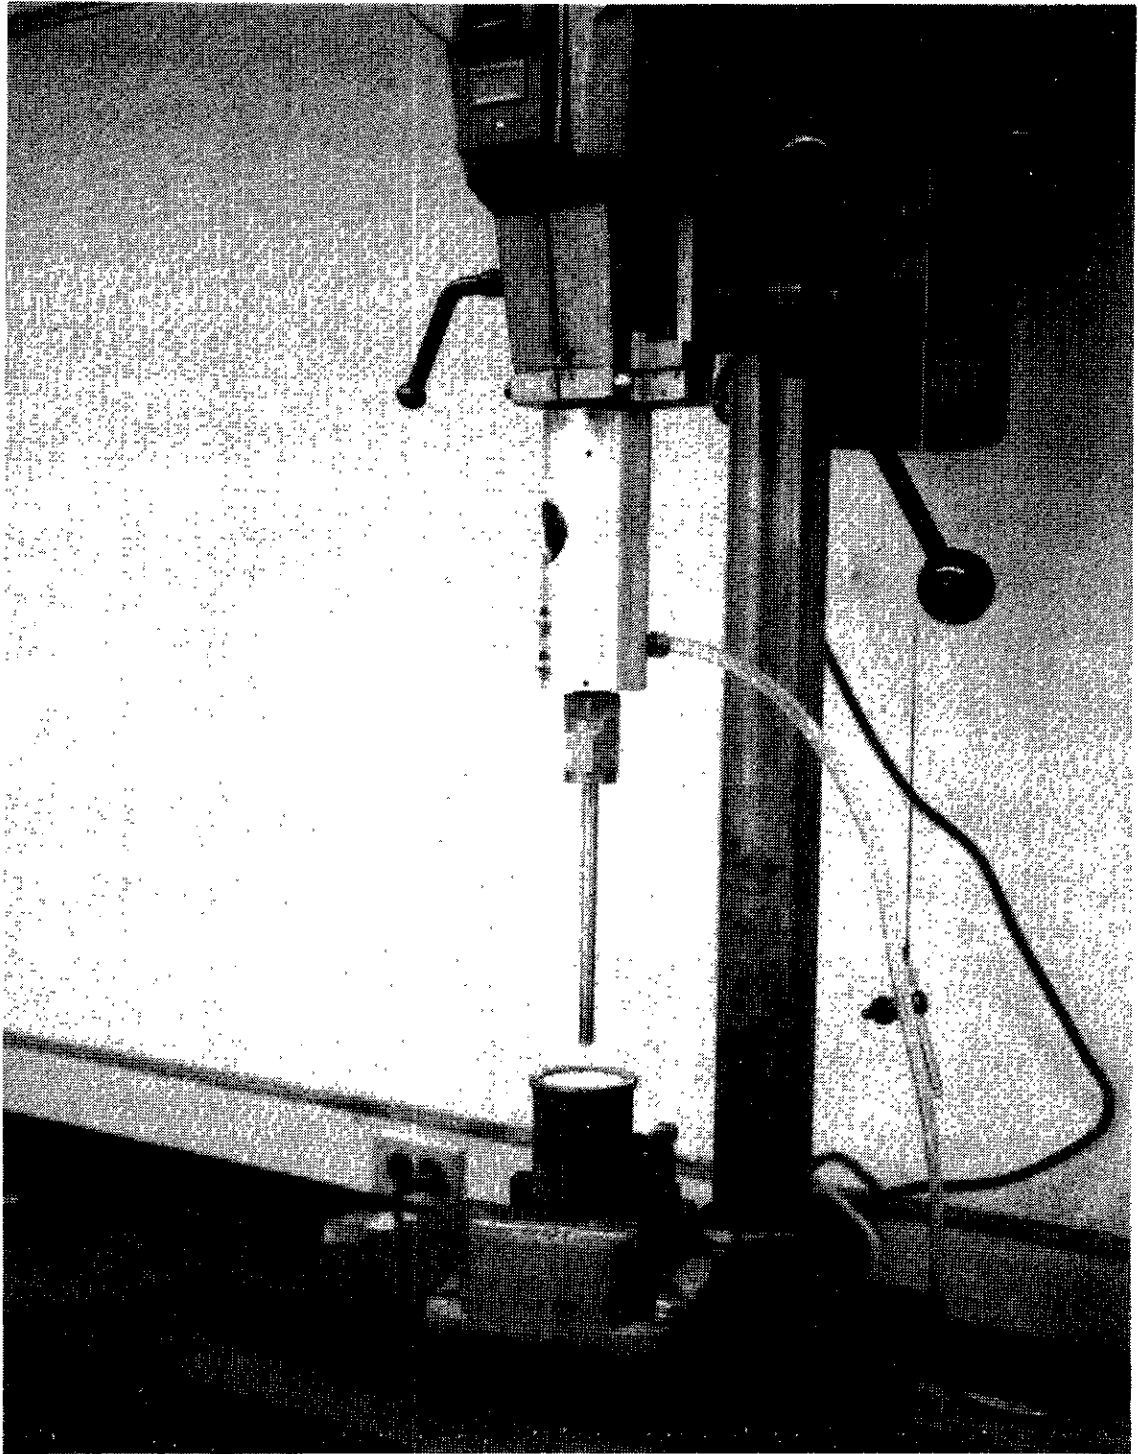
Drill Press Set Up Used to Drill the Axial Hole.
